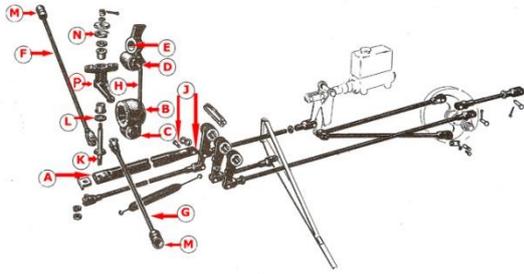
Later type rear brake equaliser linkages, early assemblies hung from the R.H axle tube on a rubber strap.
